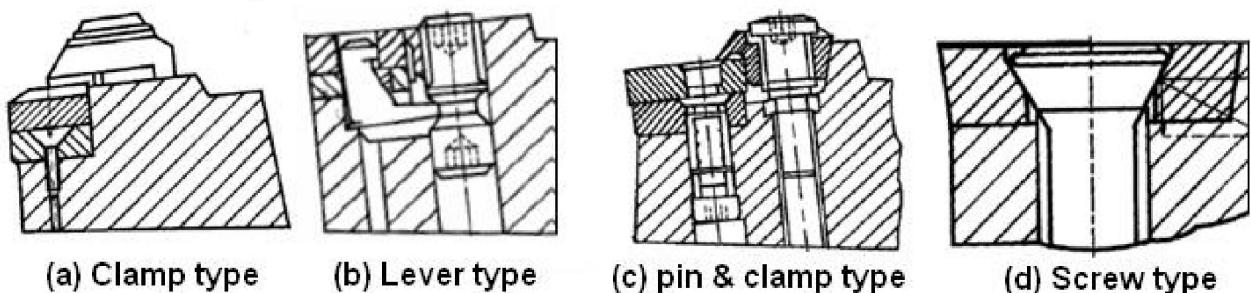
Mounting of tool inserts in tool holders by mechanical clamping
